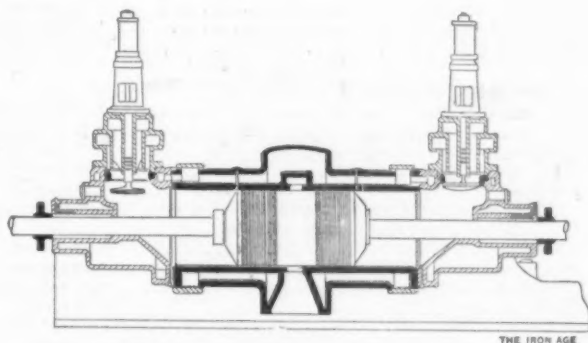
Inlet Mechanism for the Double Acting Two-Cycle Cylinder.
